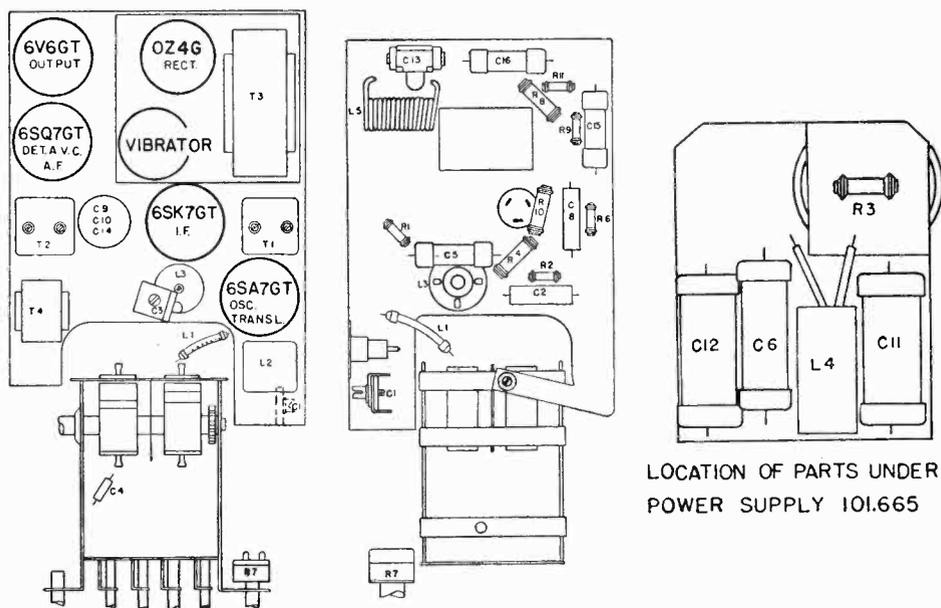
Parts layout for the set shown in Fig. 35. These layouts are helpful on auto sets, where the crowded layout makes parts identification somewhat more difficult.
